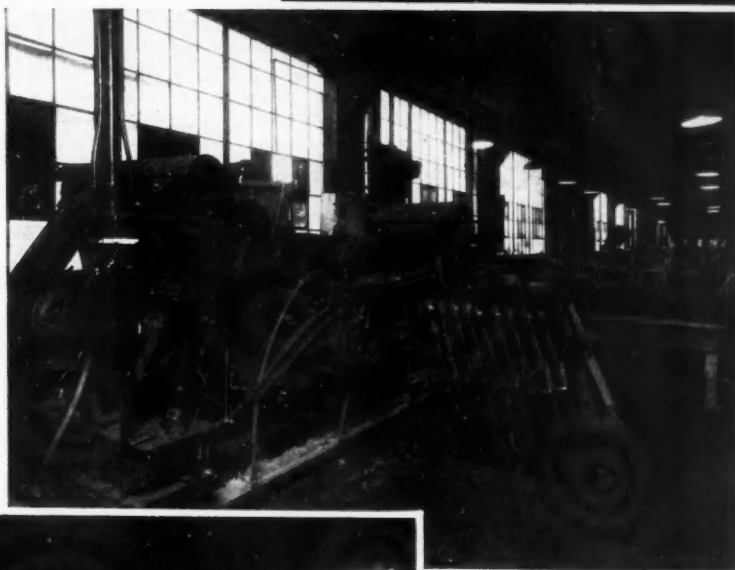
A bay in the welding department of the Hupp body plant (above). This flash welder completes the cowl assembly shown in the background
